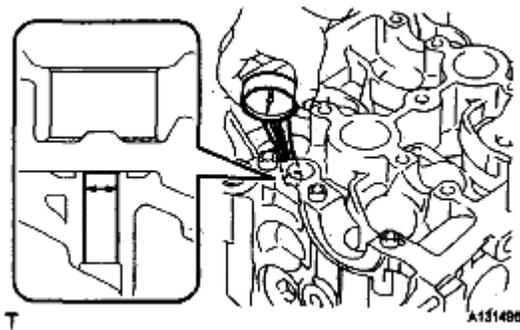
Measuring Bush Bore Diameter Of Cylinder Head
